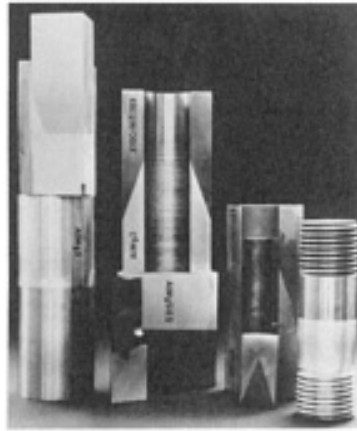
ALUMINUM-STAINLESS STEEL JOINTS
